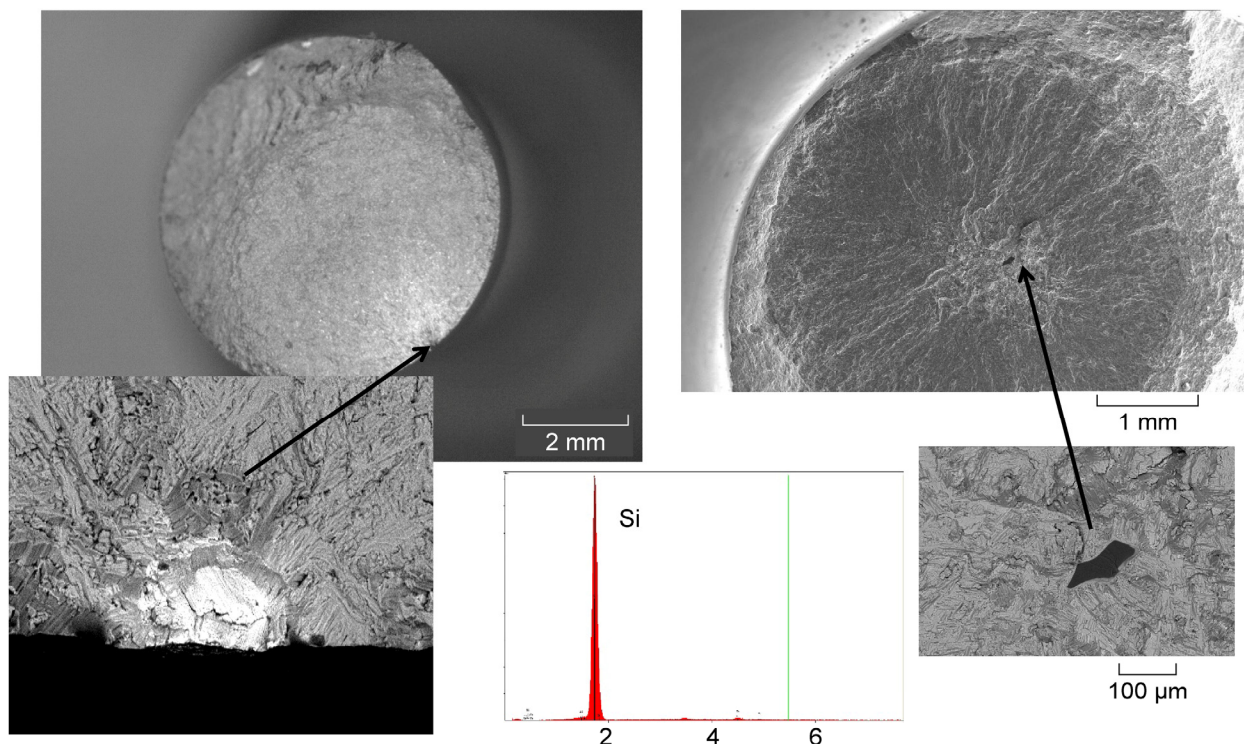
Unusual HCF fracture surfaces. (a) Sample 121, tested at 20 °C, failed at a Nb inclusion that happened to be at the sample surface. (b) Sample 76, tested at 149 °C, failed at an internal Si-rich inclusion.
